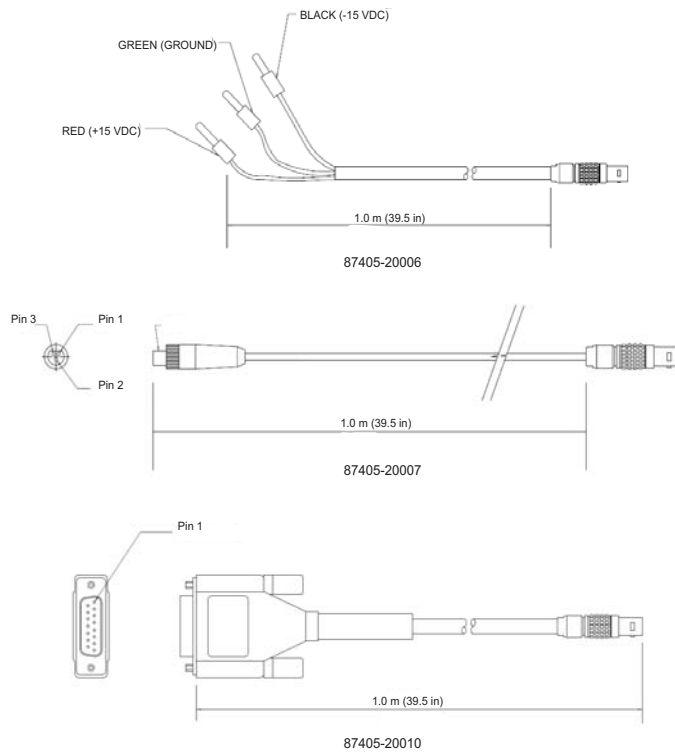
Drawings of Replaceable Parts for 87405C Preamplifier
